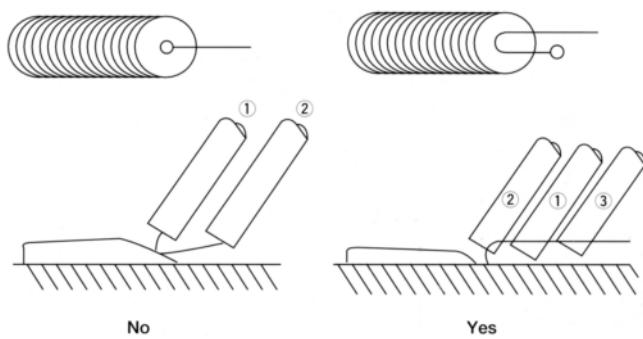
The backstep technique prevents porosity at the arc starting area of the weld bead
